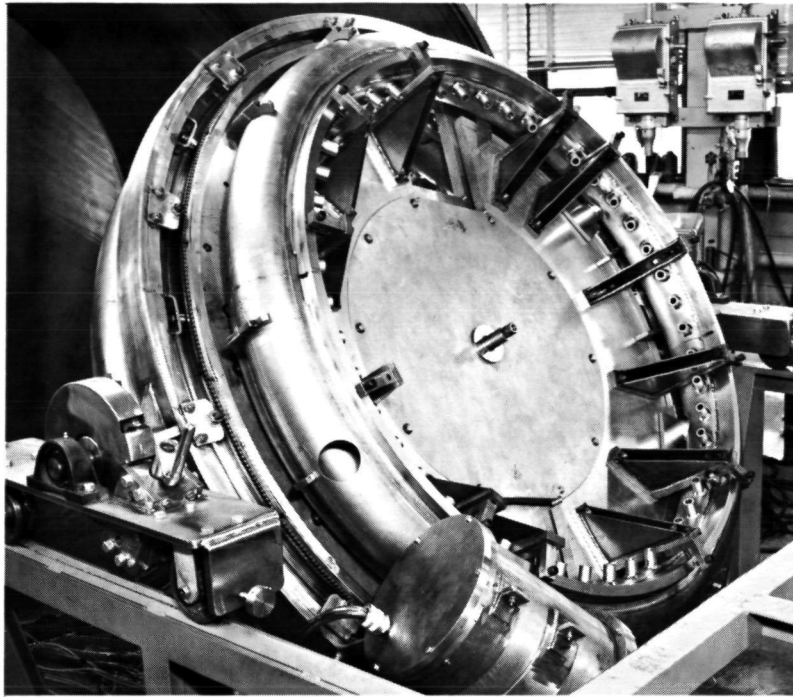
Weld Alignment Fixture for Outlet Manifold Shell Ring. (P69-6-10B)
